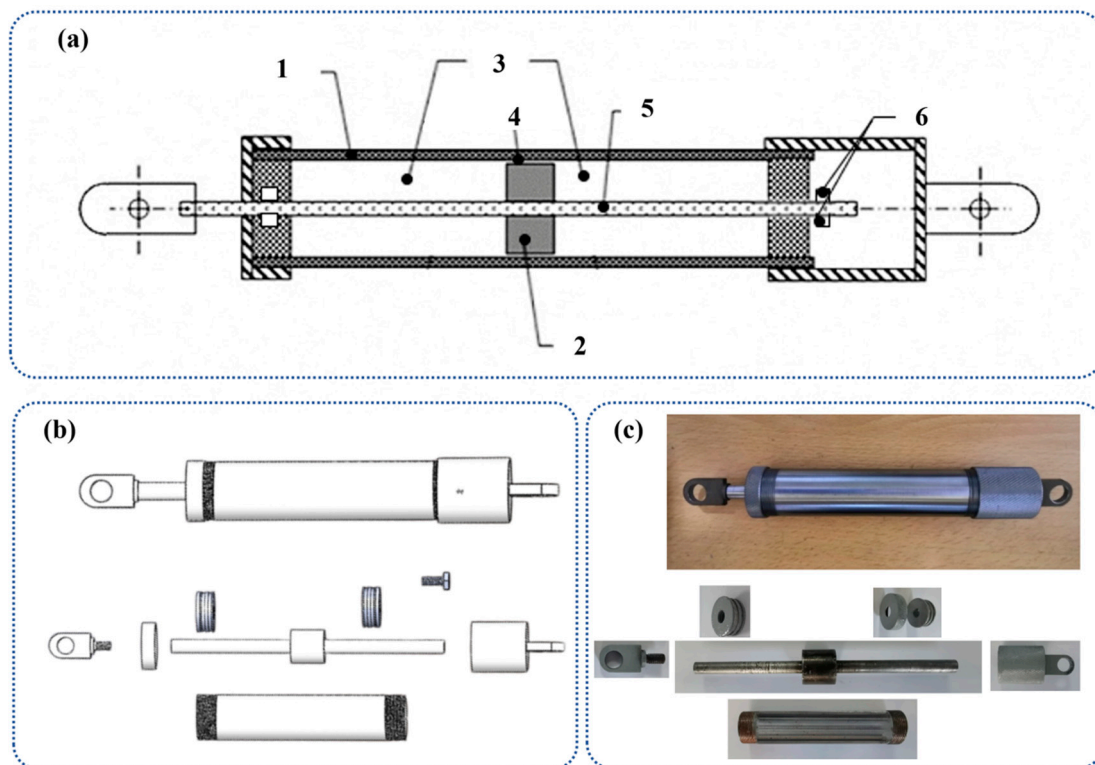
Designing of the STF damper (a) schematic, 1. Damper tube, 2. Piston head, 3. Cylinder chamber, 4. Annular gap, 5. Piston rod, 6. Seal rings (b) 3D model (c) Prototype.
